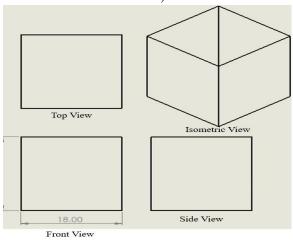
(2D and 3D Drawing Of Measuring Tank)
